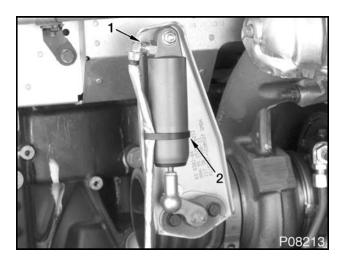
Pressure air line connection to exhaust manifold with butterfly
